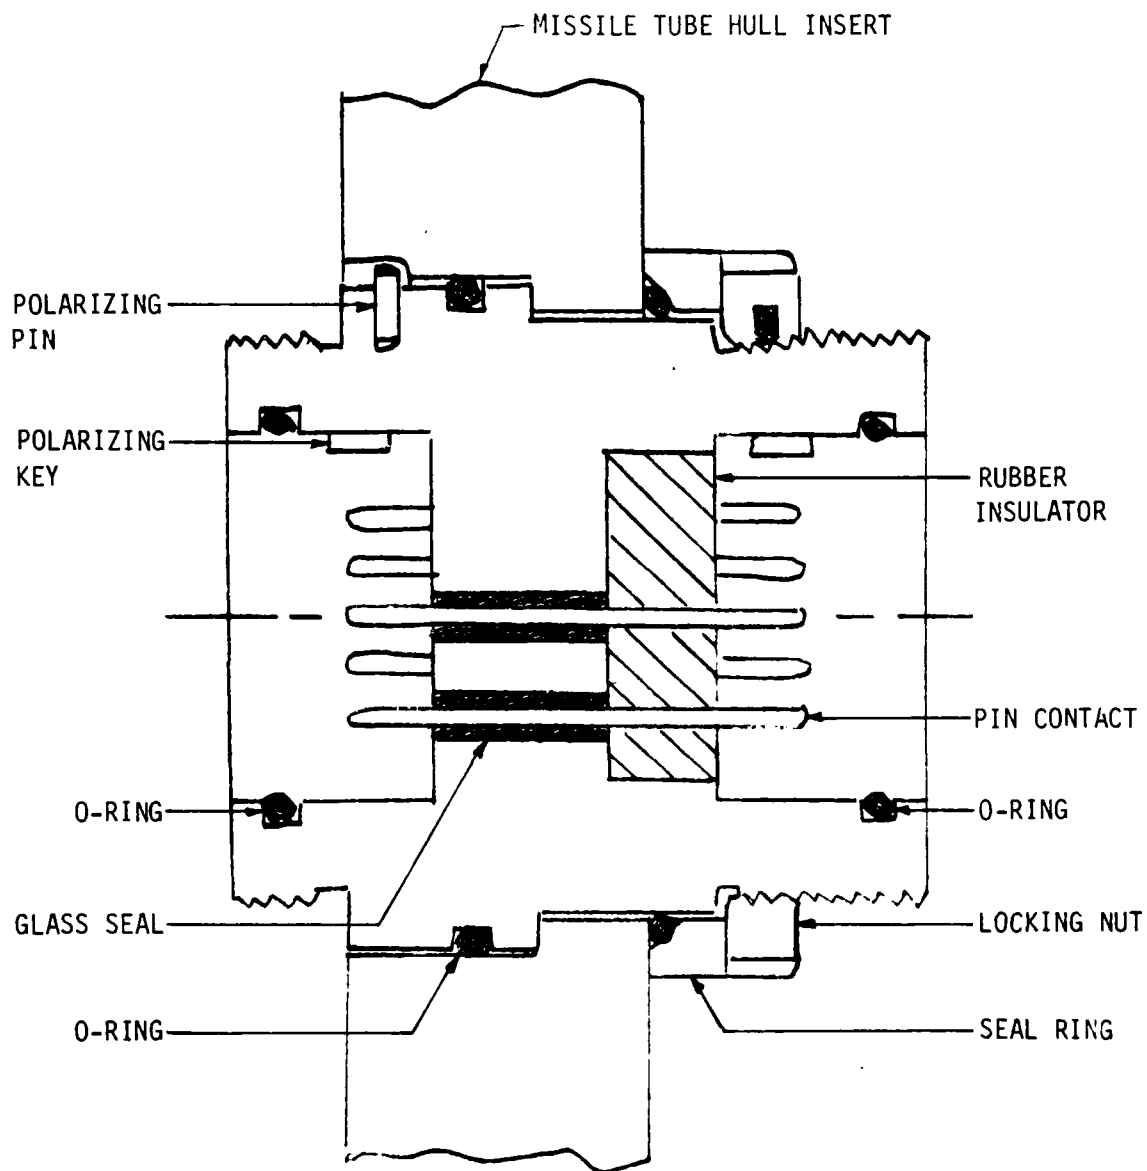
MIL-C-22249 MISSILE TUBE PENETRATOR
